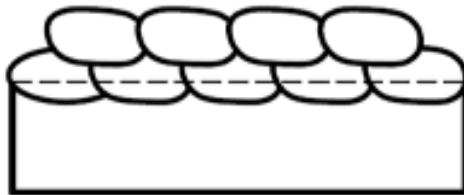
Overlay (Multi-Layer) Build-Up Welding
